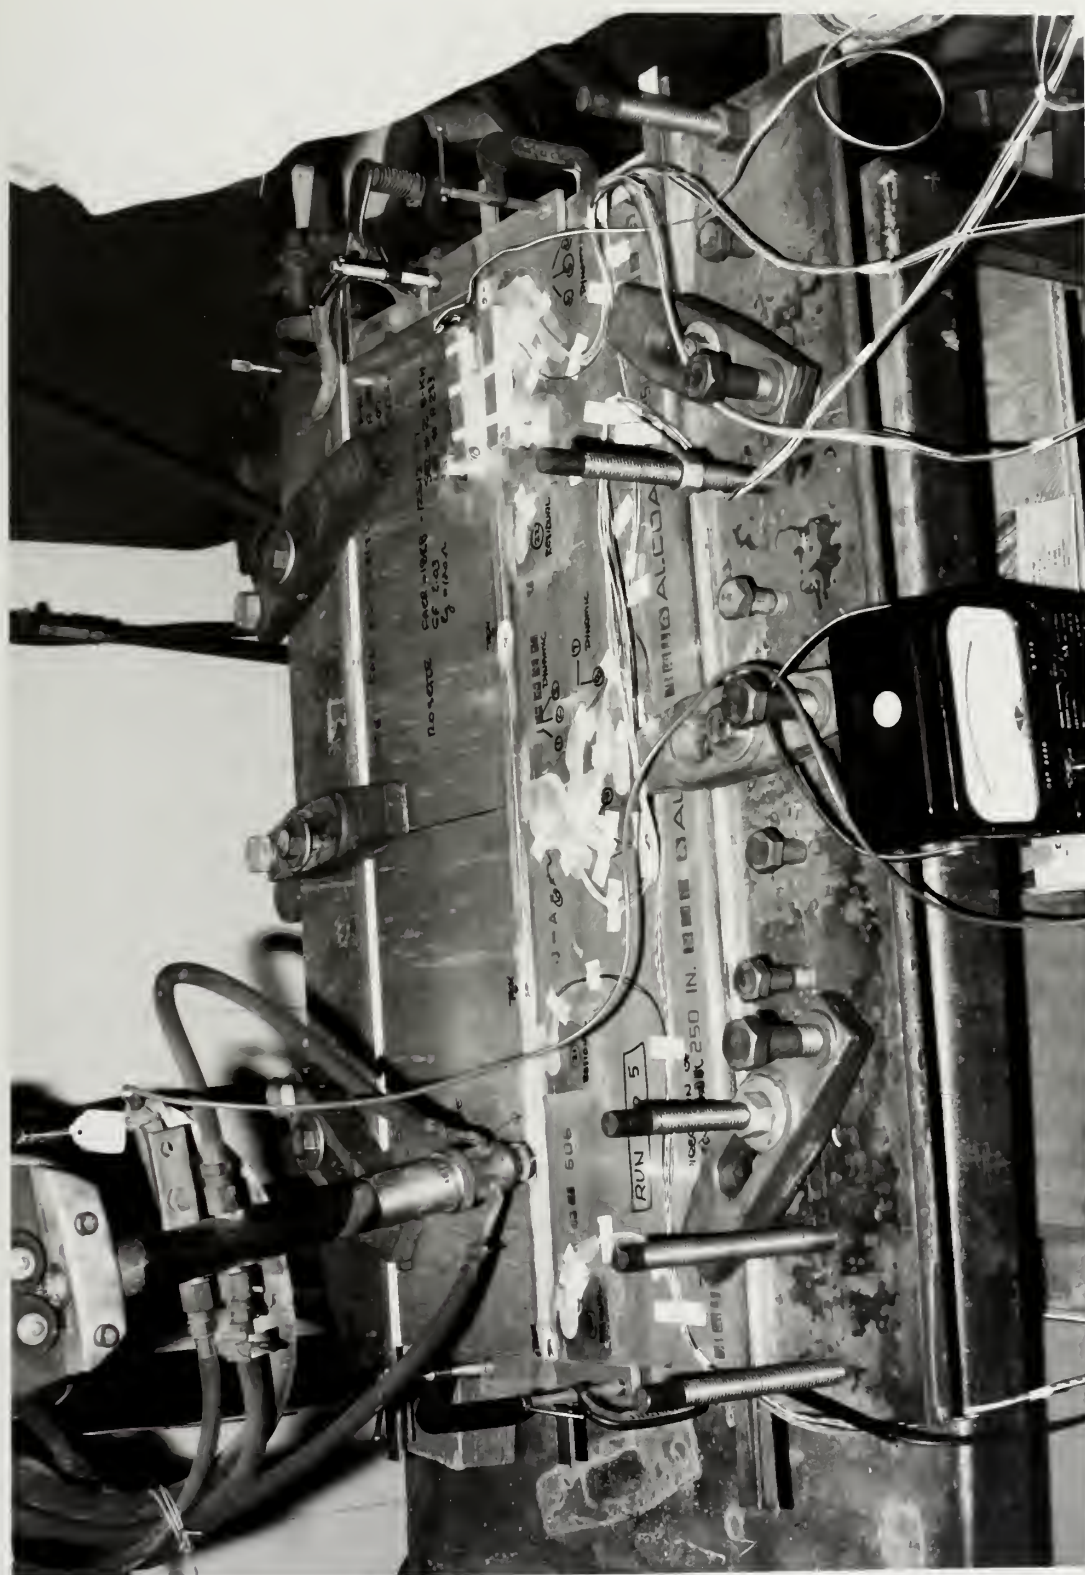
Plate Instrumented and Clamped Under Welding Torch.
